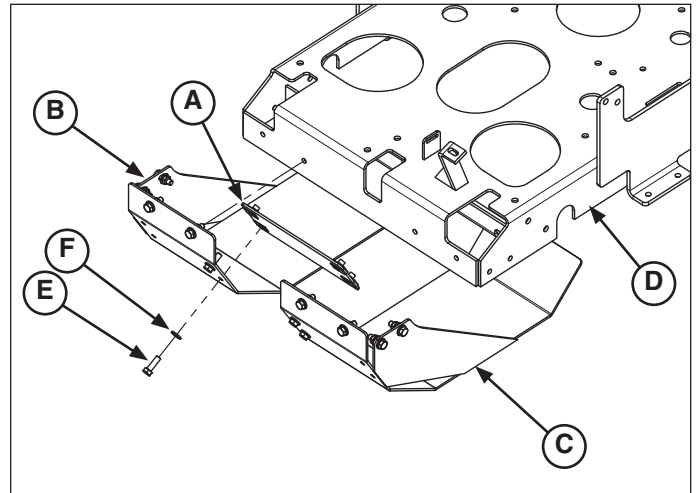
Installing the Rear Guard Plate (Skid plates shown exploded from frame for detail)
